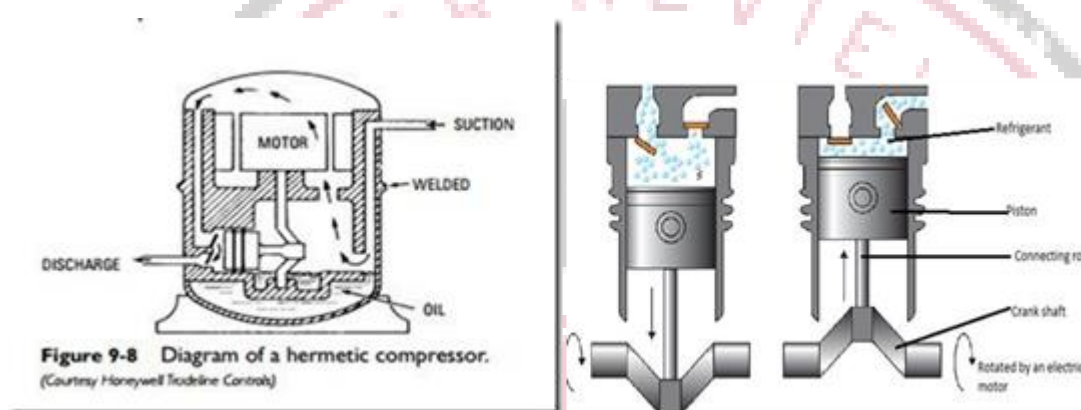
Block diagram of compressor Fig.3.2 Piston movement of compressor
